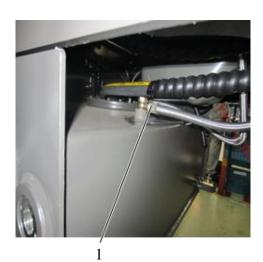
1 Fuel return pipe 2 Hollow bolt
